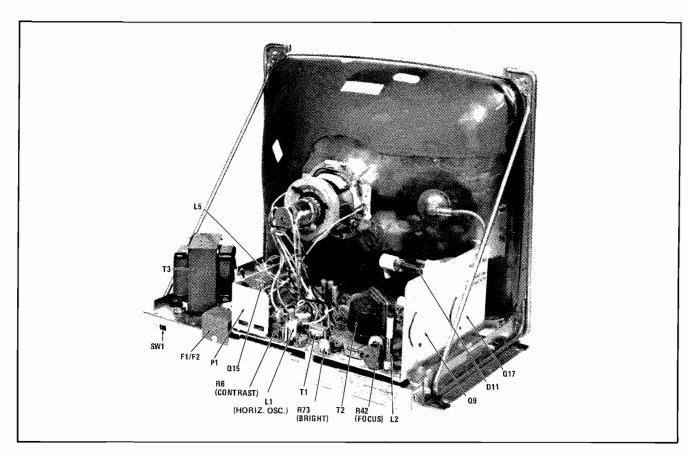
Motorola Monitor Chassis Rear View —Component Location
